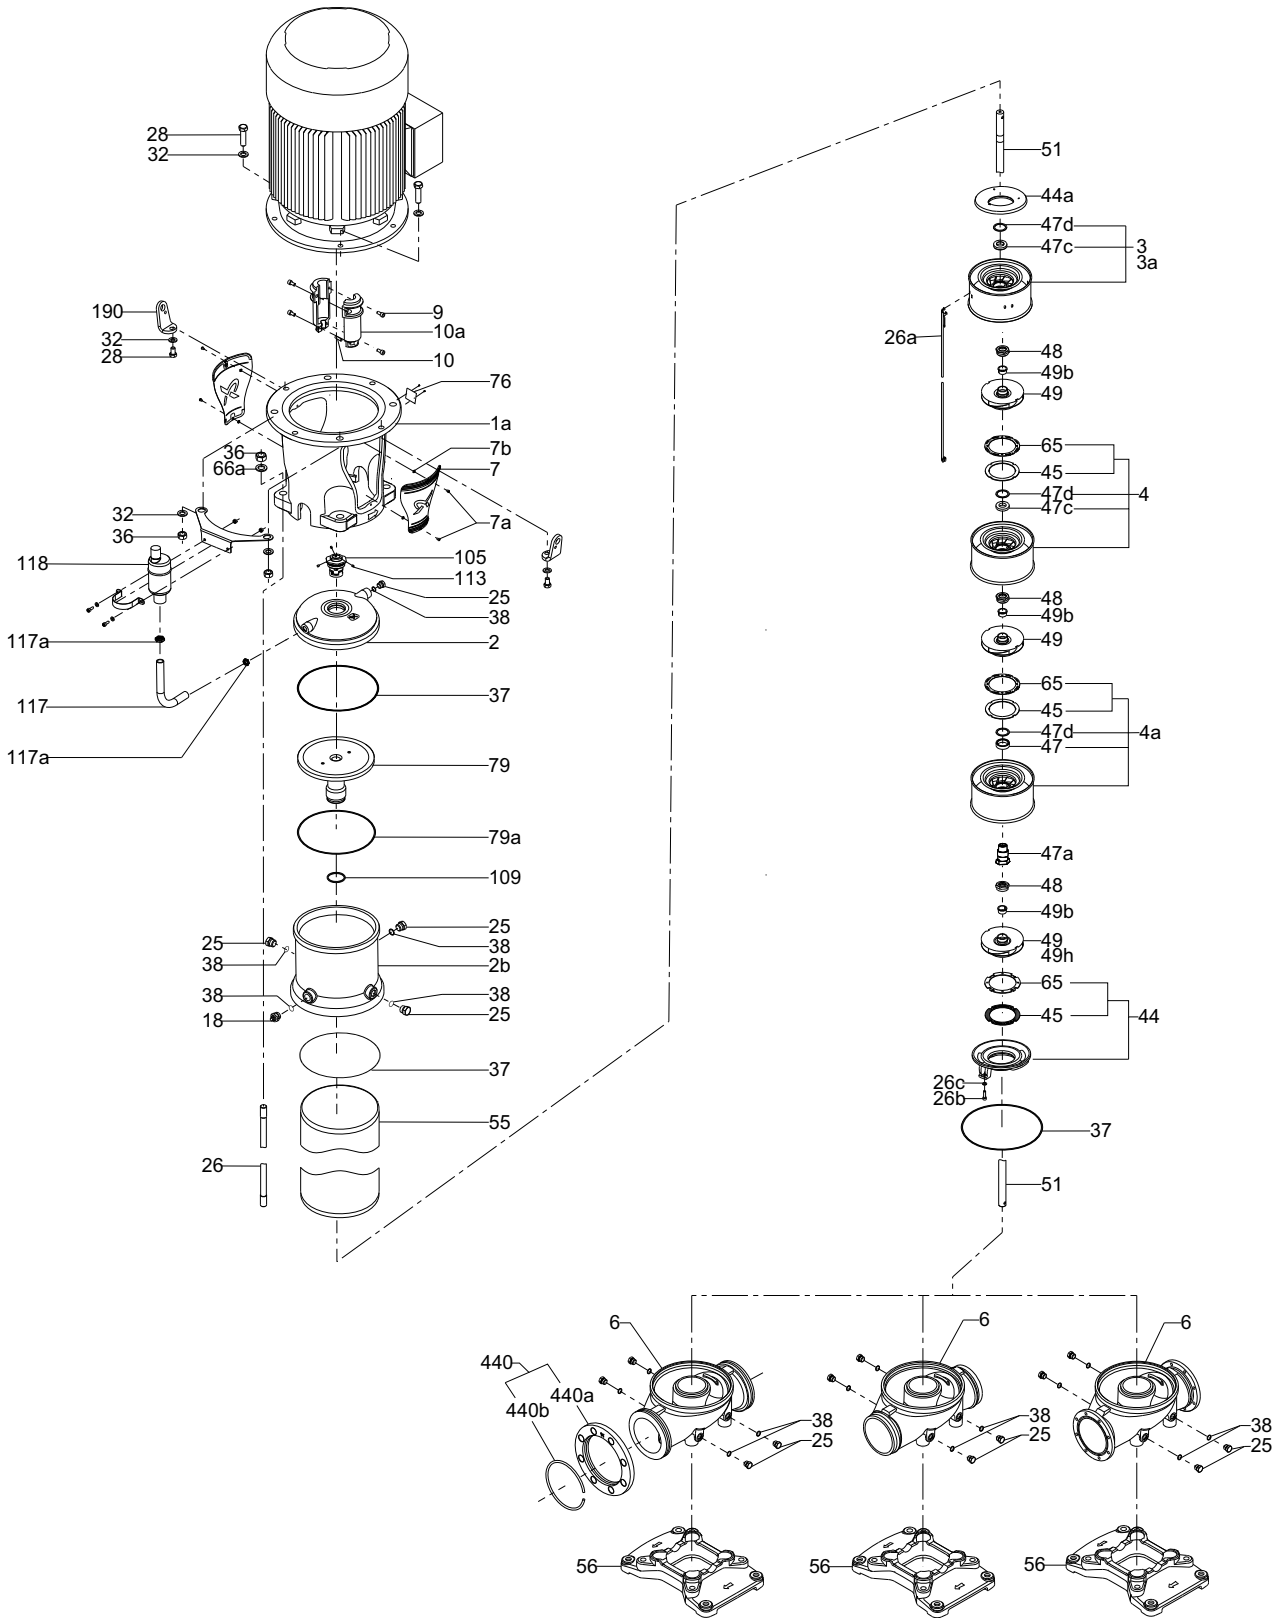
Exploded view of CR, CRN pump with air-cooled top
